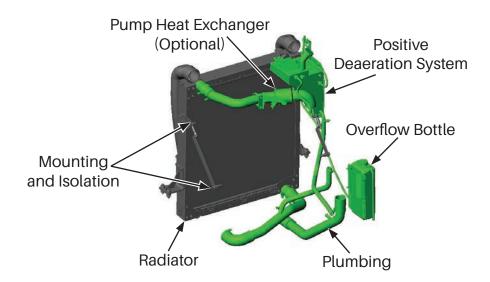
Typical Engine Cooling System - Overflow Bottle Expansion
